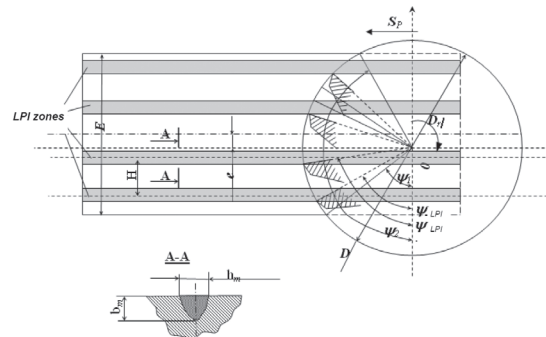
LPI zones layout diagram during face milling: E - work piece width; e - rotary cutter axis to work piece axis offset; S_p - feed direction; D - rotary cutter diameter; D_f - rotary cutter rotation direction; ψ_p, ψ_2 - bit work piece entry and exit angles; ψ_{LPI1}, ψ_{LPI2} - LPI bit entry and exit angles; H - distance between LPI zones; h_m and b_m - LPI zone width and depth.
